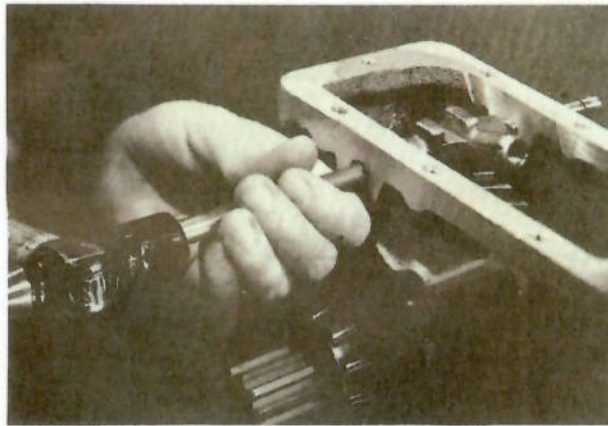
REMOVING THE HIGH AND LOW FORK SHAFT FROM THE TRANSMISSION CASE.
